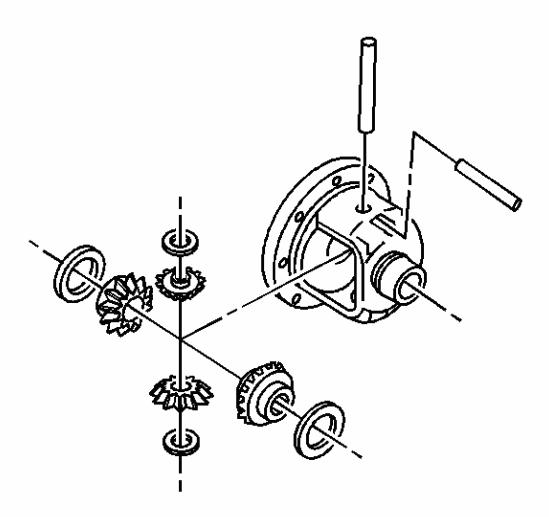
Exploded View Of Differential Case Courtesy of GENERAL MOTORS CORP.
